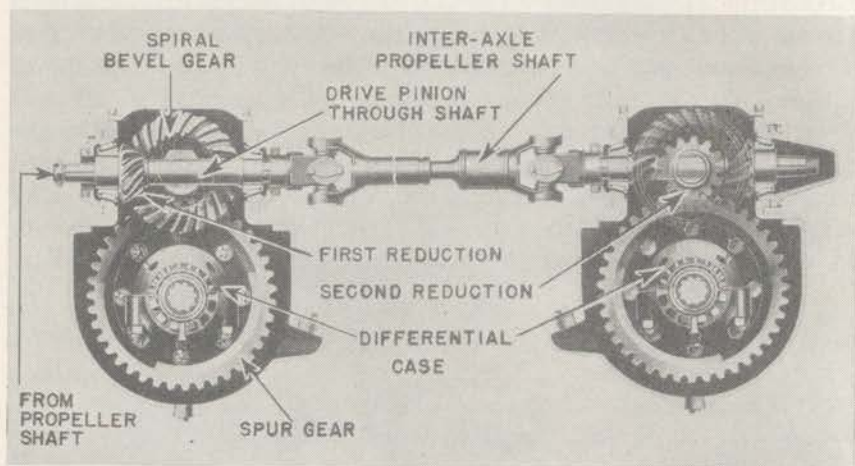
Tandem dual rear axle arrangement with double reduction final drives.
